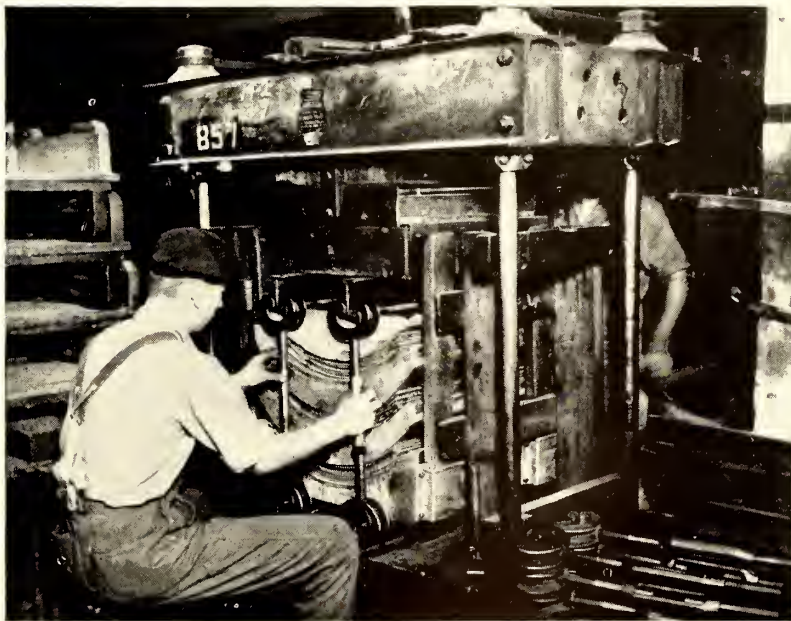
Forming curved plywood parts in quantities by cold-pressing technique.
